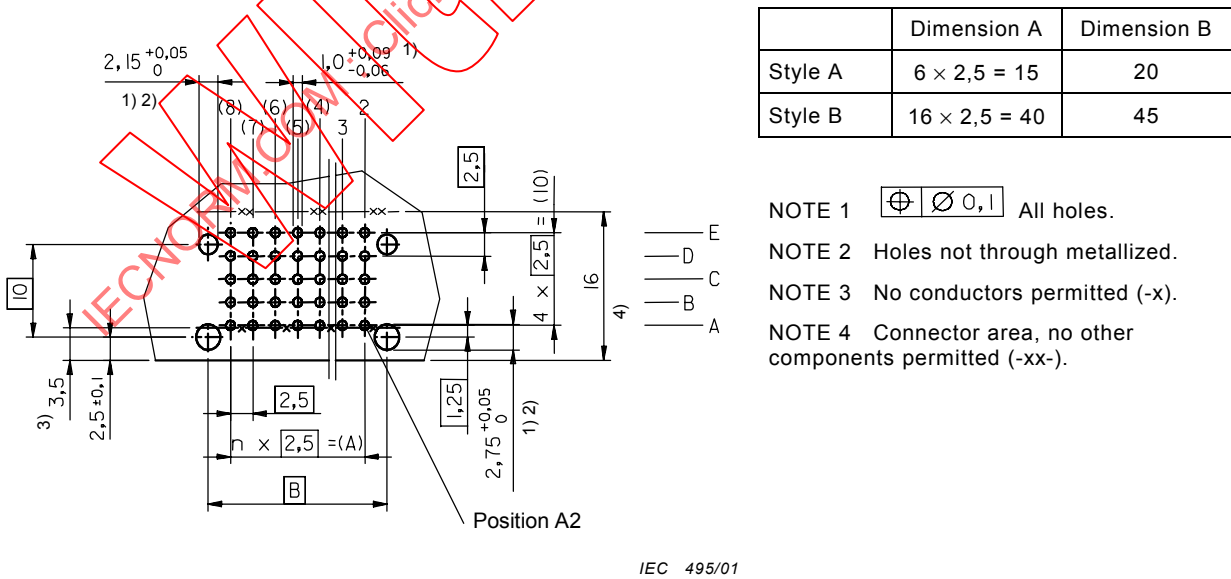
Example of hole pattern on printed board in the 25 mm equipment practice
